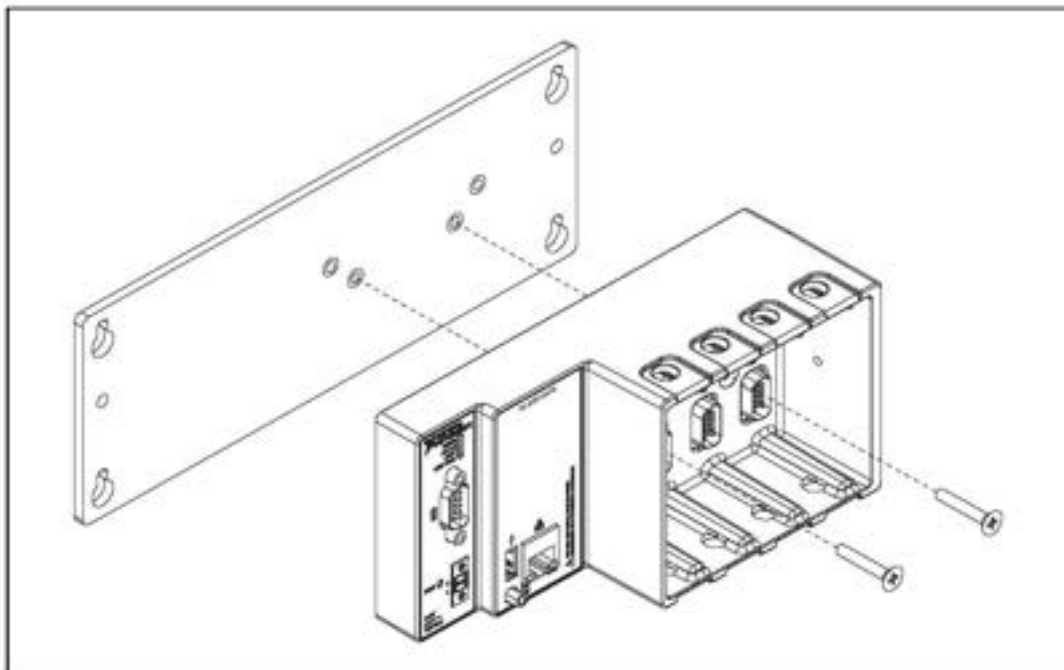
Installing the Panel Mounting Plate on the cRIO-9075/9076
